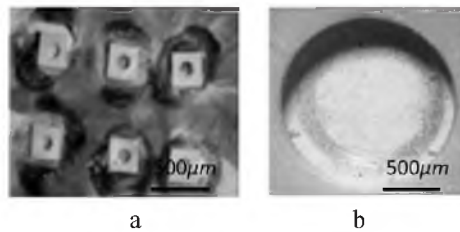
Ultrasonic machining specimen: (a) ceramic; (b) F2.8 circular hole.
